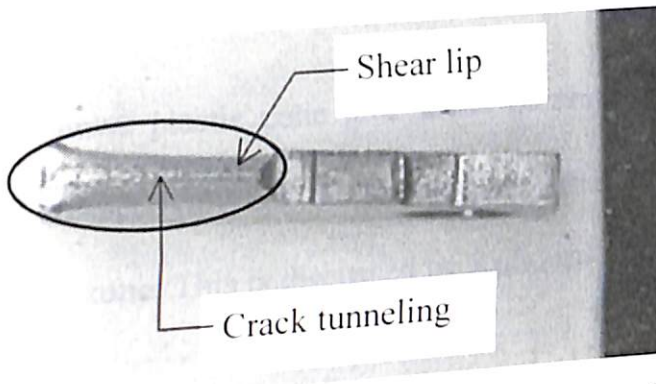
General features of fracture surfaces produced during stable and complete tearing in EDD258.
